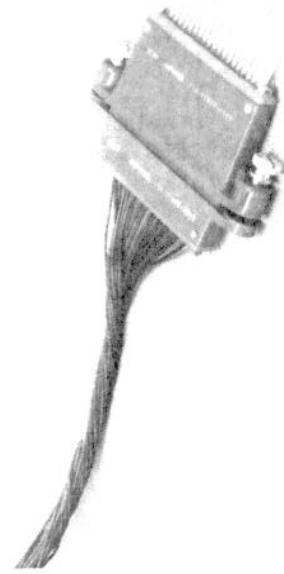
FLAT CABLE TO ROUND WIRE TRANSITION
